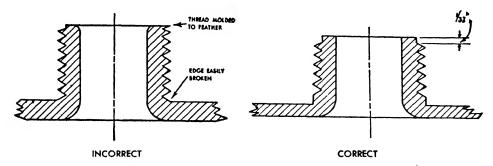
Start threads at least 1/32 in. from end of face perpendicular to axis of the thread.
